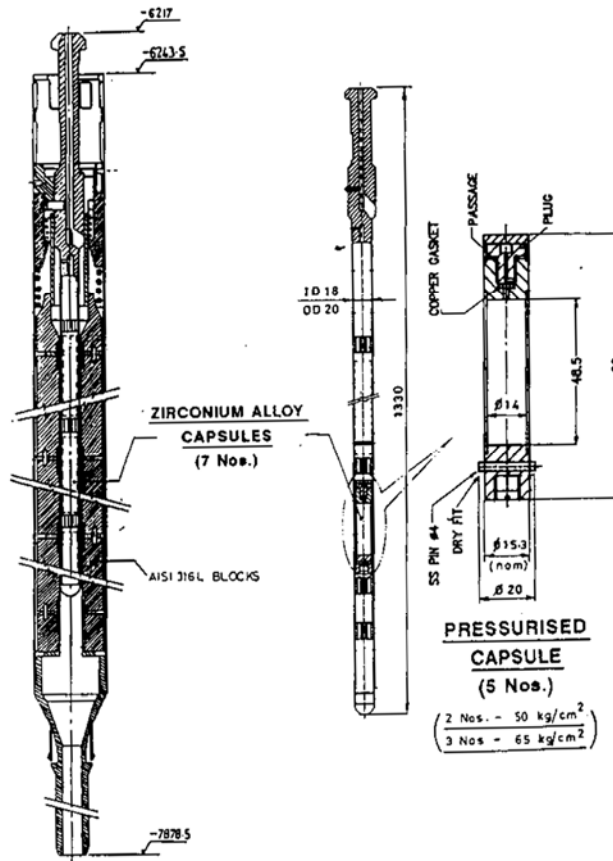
Irradiation capsule with zirconium alloy pressurized capsules locked in special sub assembly.
